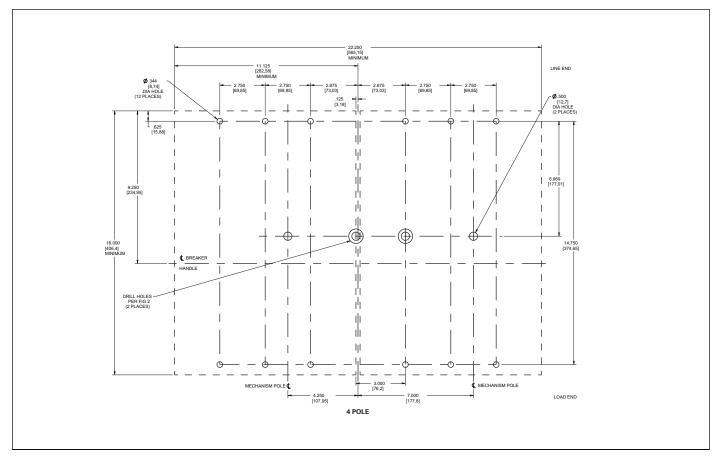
PD5-Frame 4-Pole Circuit Breaker Mounting Panel Holes Sizes and Dimensions.
